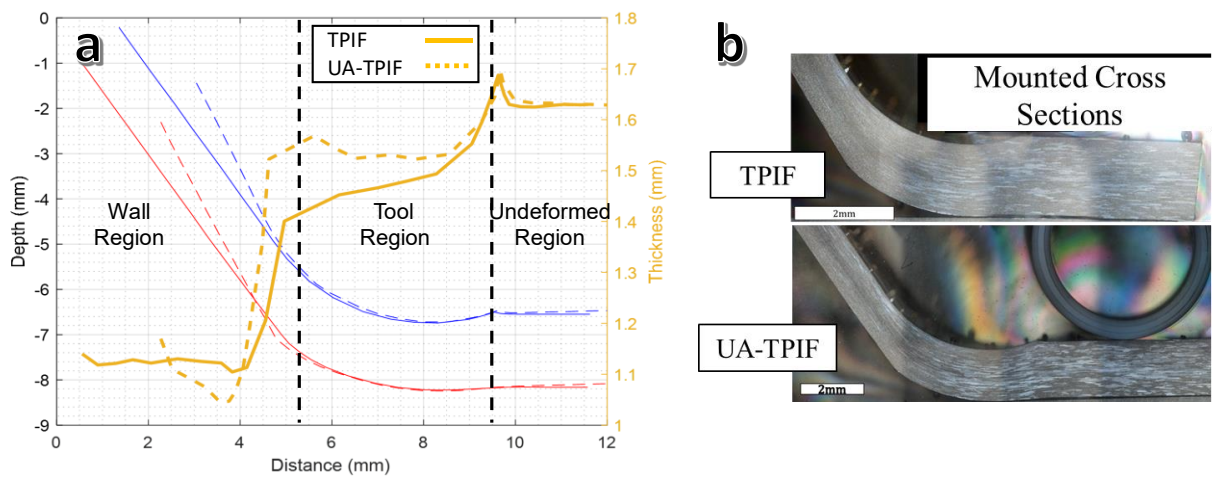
a) Sheet profiles and corresponding thickness; b) cross-sectional image near the bottom of the sheet or the last tool contact position.
